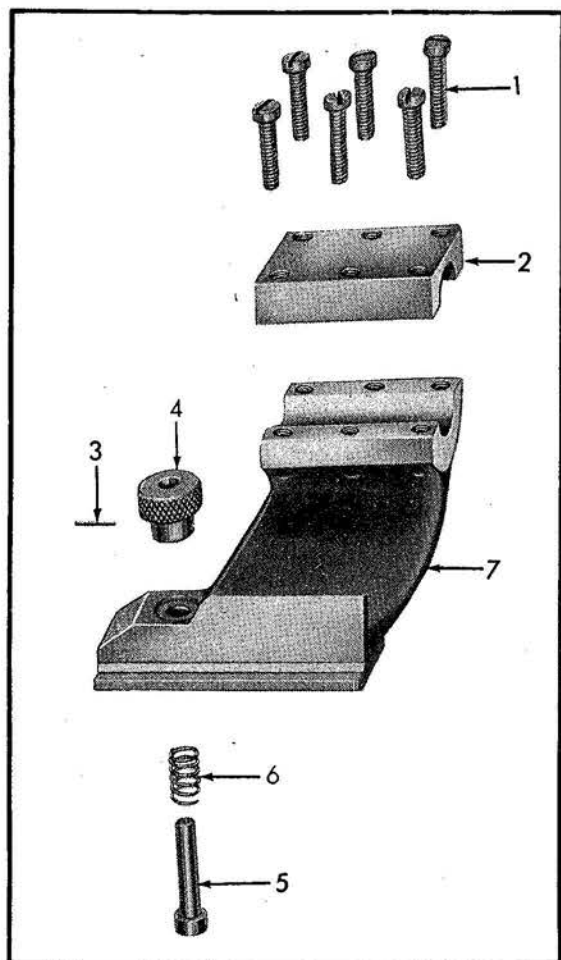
Sequence of Disassembly of Binocular Holder Assembly
